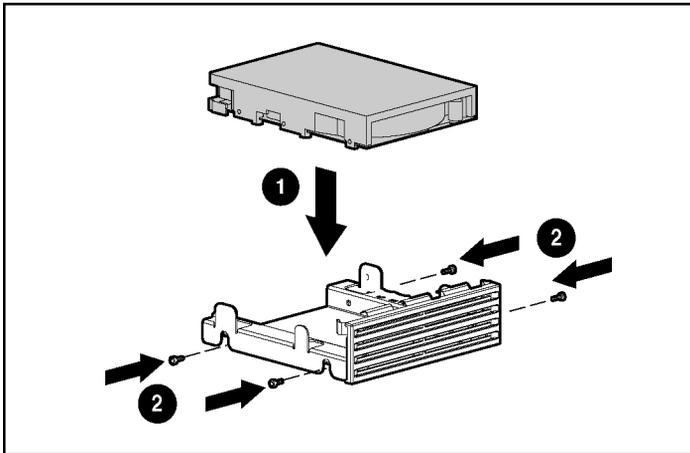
Securing a non-hot-plug hard drive to the bezel blank tray
